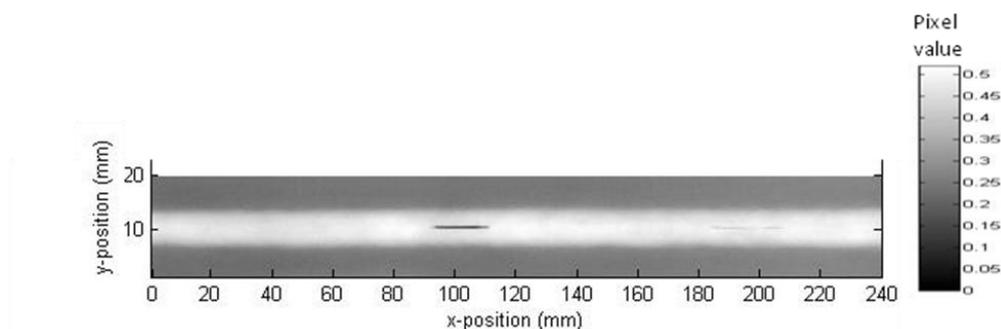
Example of radiographic image which shows indication of defects in a welded sample [18]
